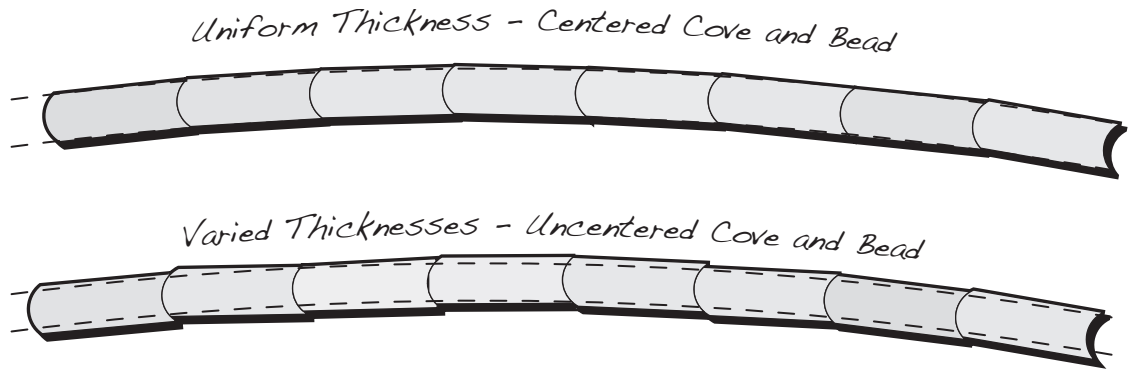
The cove side of a cove-and-bead strip can be delicate. If you leave a slightly square edge it will be stronger than a fine feather edge. The strips need to be uniform in thickness to get a uniform edge on both sides.
